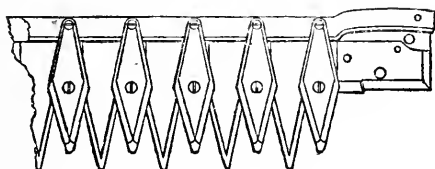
Cutting Apparatus of First Wheeler Machine, 1853.
